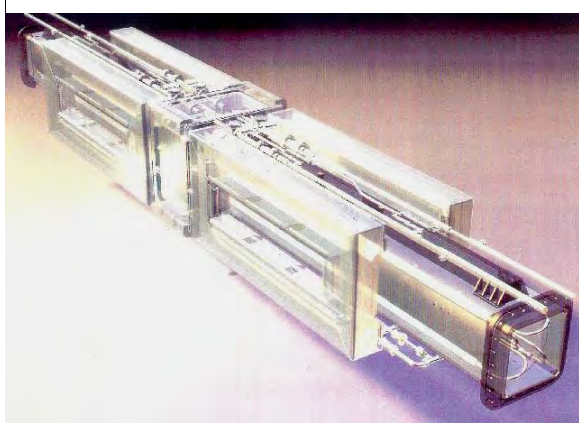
CAD-CAM Drawing of Maglev-2000 Superconducting Quadrupole
